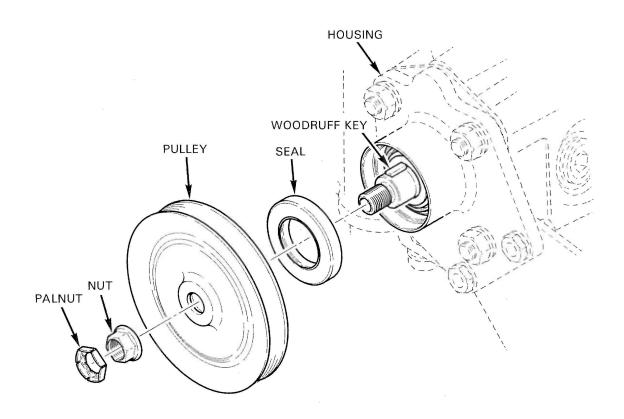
CARTRIDGE ASSEMBLY - COMPRESSOR DRIVE
